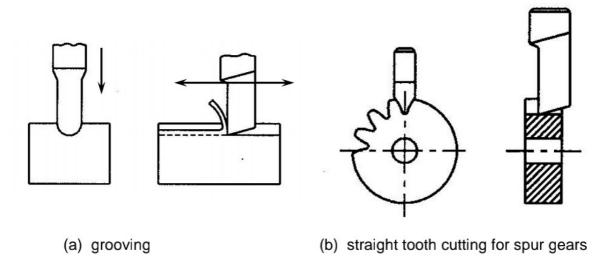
Making grooves and gear teeth cutting in shaping machine by form tools.
